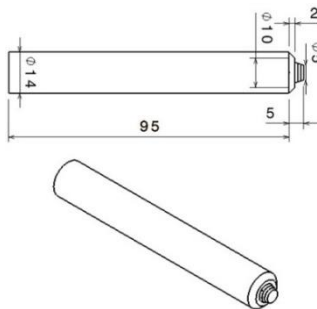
The schematic of pin used for friction stir welding in this research
